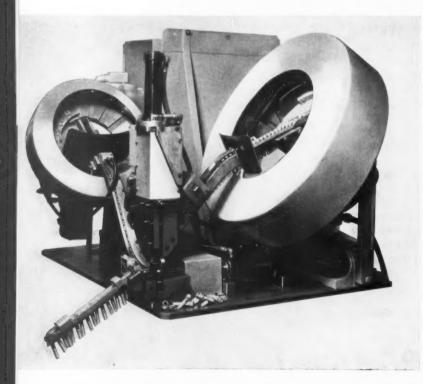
Assembly machine for placing split lock washers on automotive body bolts and preloading assemblies into magazines holding eighteen units.
